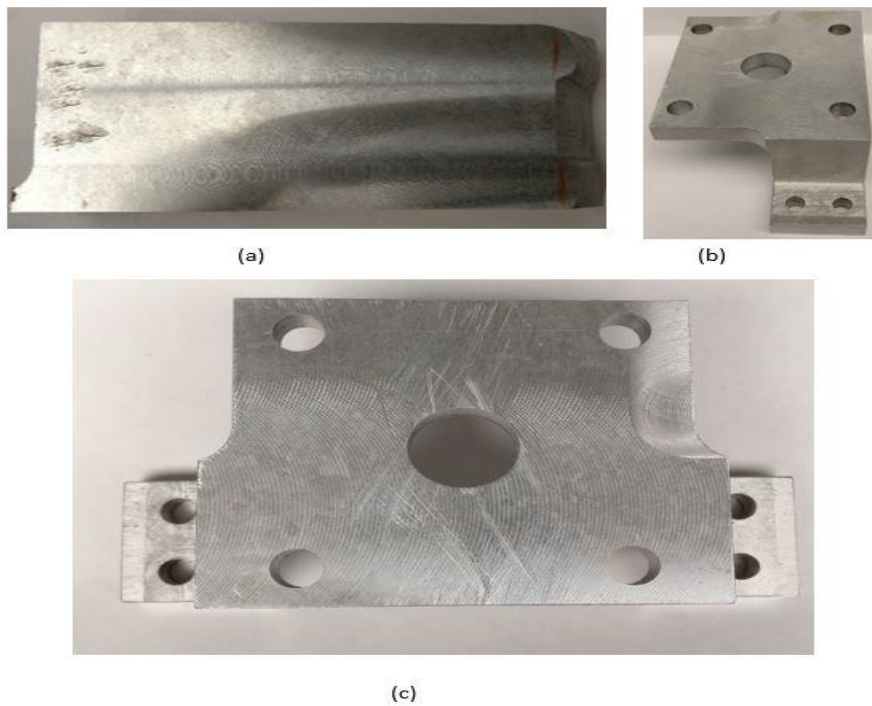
(a) AlSi9Cu3 raw material used in die casting been faced (b) Side view of machined part (c) Top view of the part.
